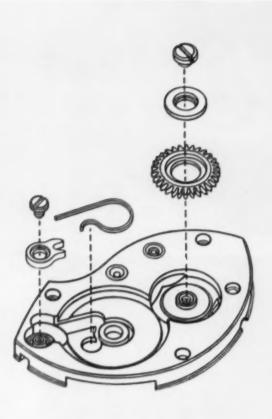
Initial operation in assembly of watch movements. Assembly shown is a top plate.
